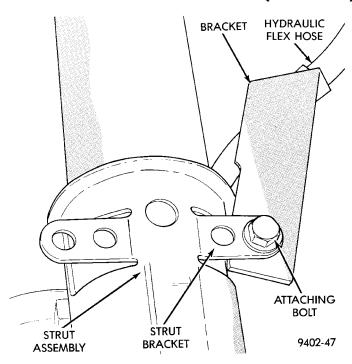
Hydraulic Flex Hose Bracket Attachment To Strut
